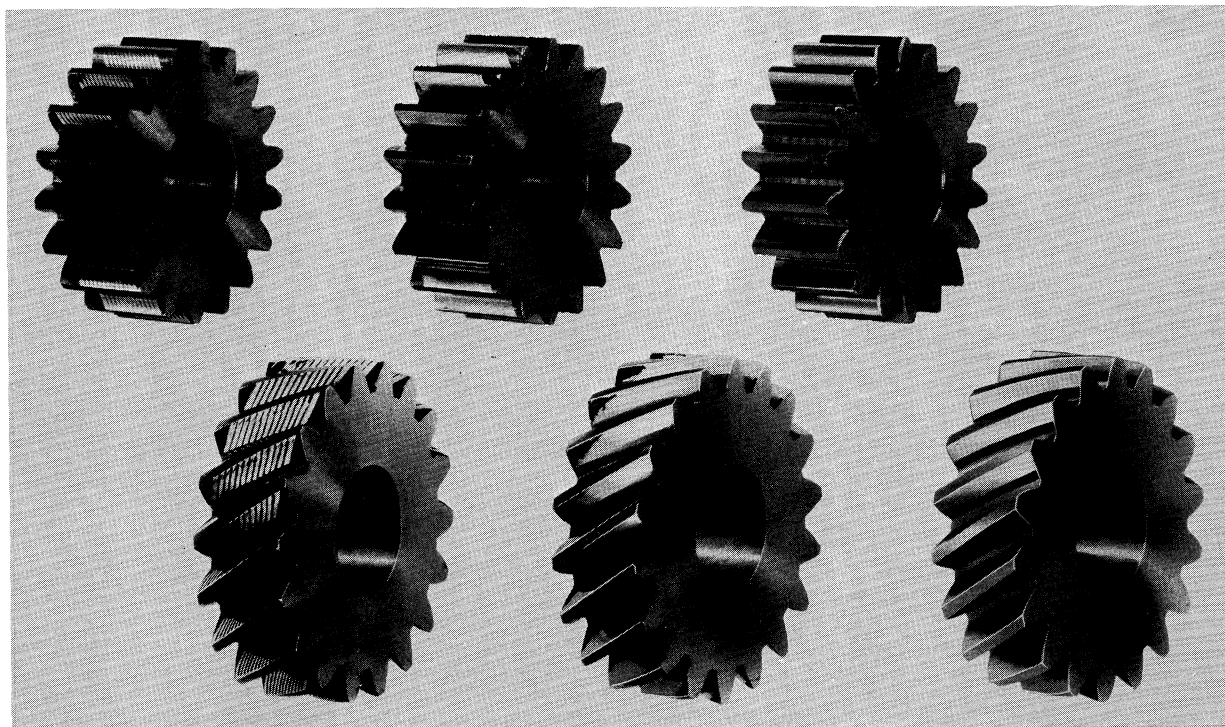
The cut developed with varying amounts of cutter reciprocation in shaving spur gears, top, and helical gears, bottom.
